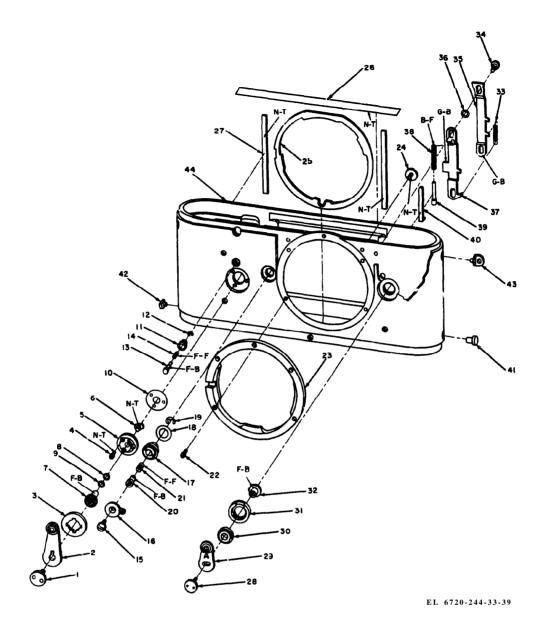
Shutter curtain and main roller assemblies, exploded view.
